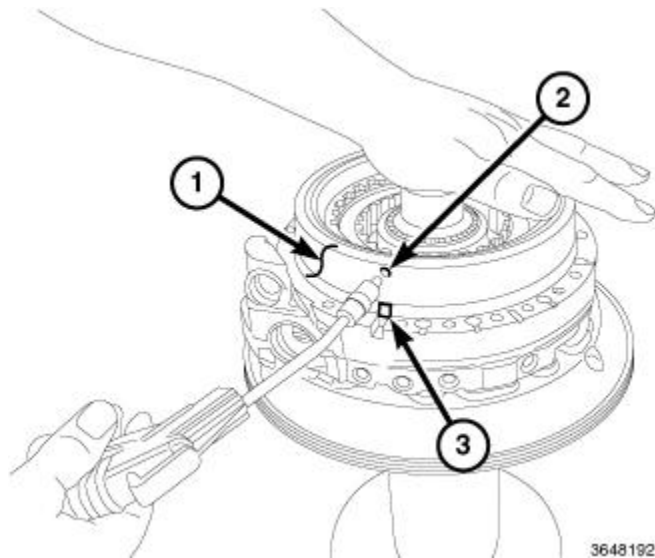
B-Piston, Hole & B-Piston Alignment Tab
